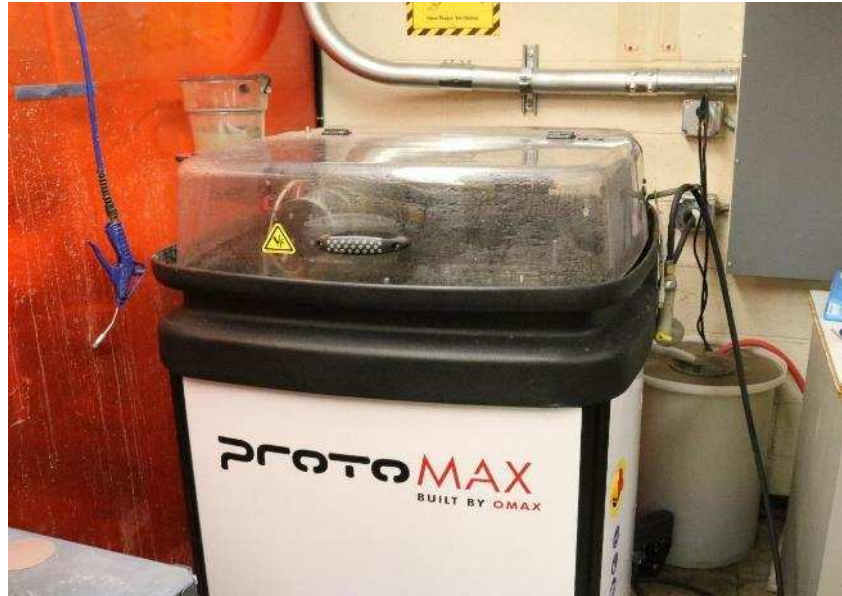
ProtoMax waterjet in the SEAS Machine Shop.
